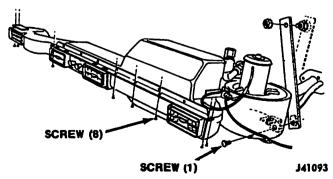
E-10 Evaporator Housing Mounting— Charokee-Wagoneer-Truck Models
